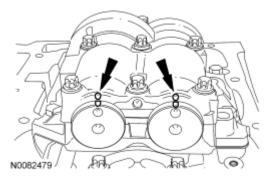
Locating Balancer Unit And Shafts Reference Mark
